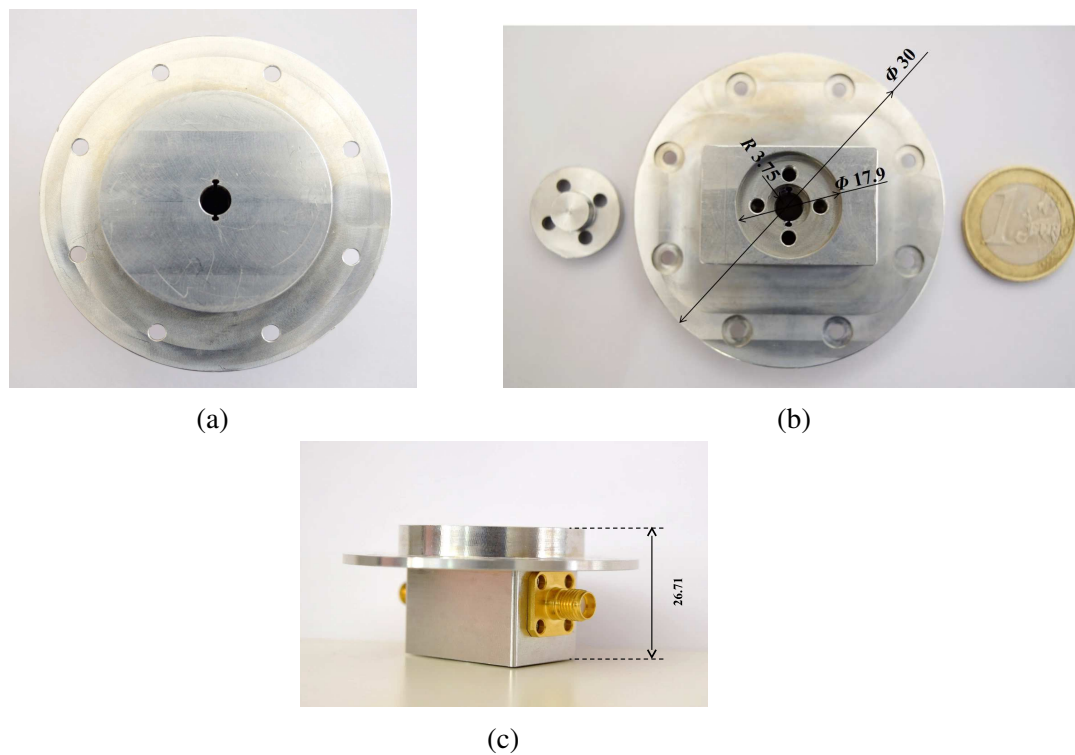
Pictures of the manufactured feeding system encapsulation: (a) top view, (b) bottom view and (c) lateral view.
